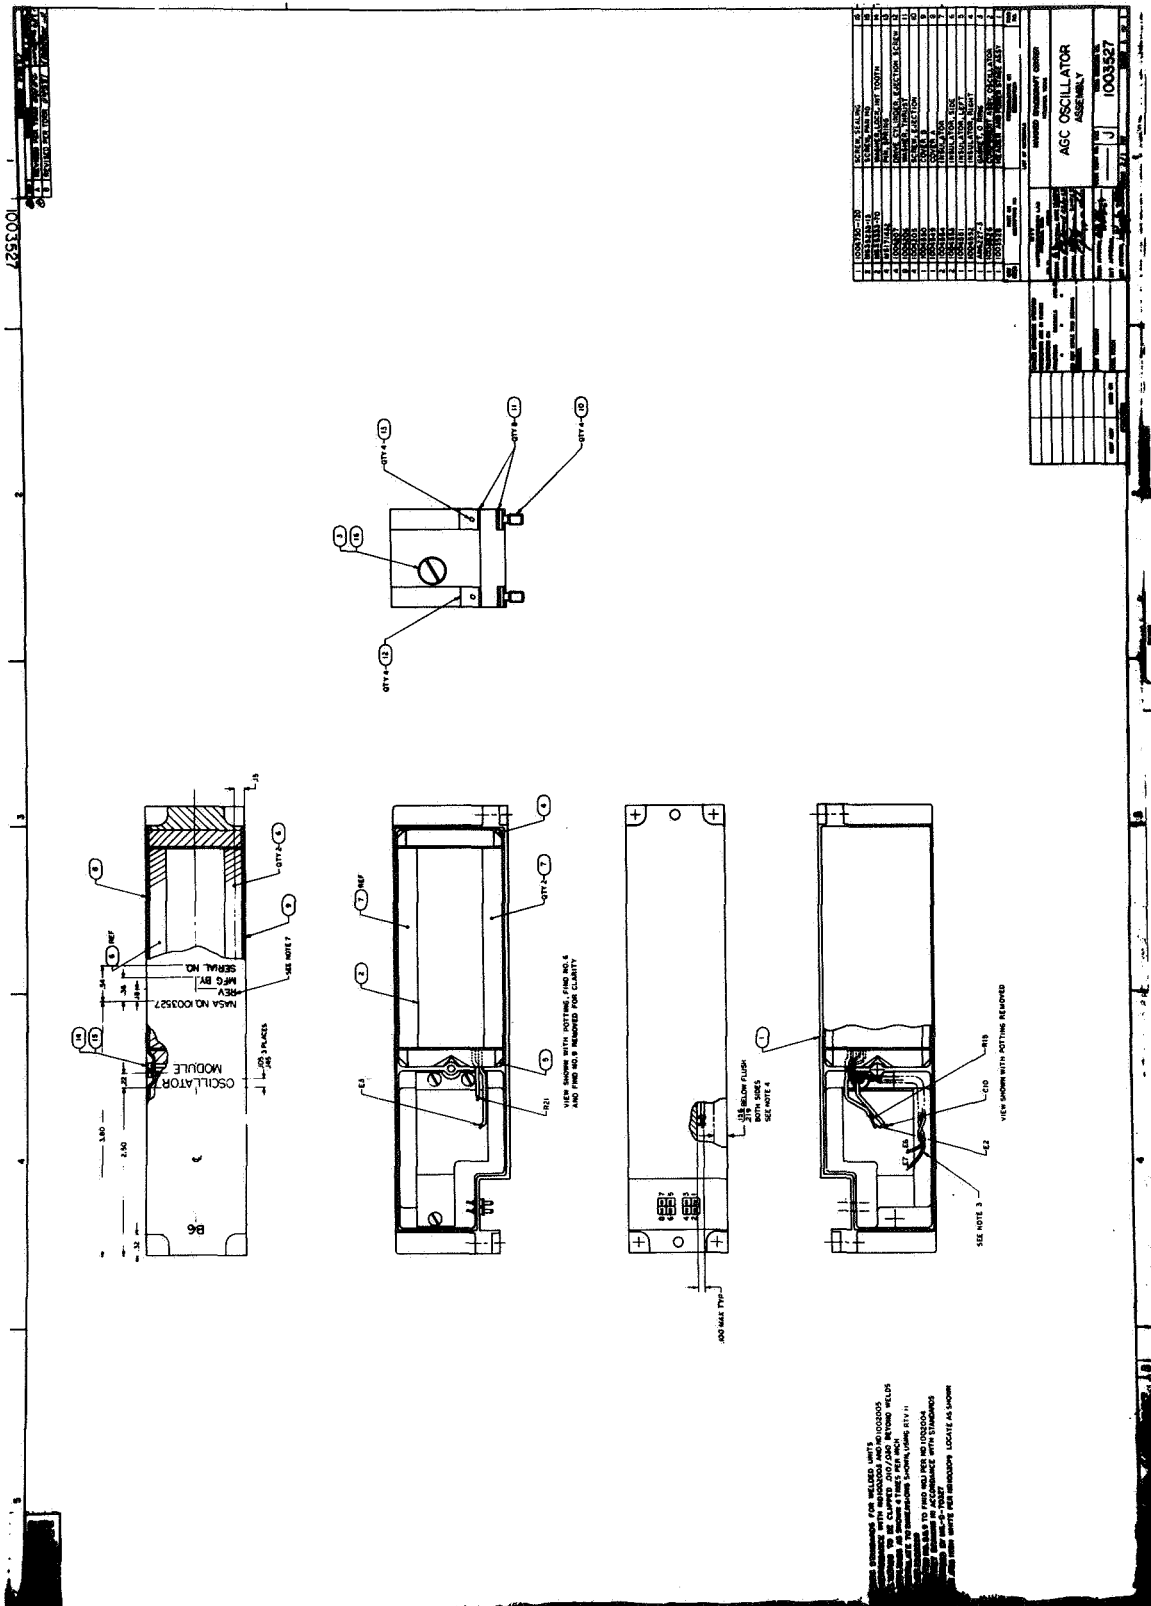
Sample Assembly Drawing Illustrating Use of Find Numbers.
